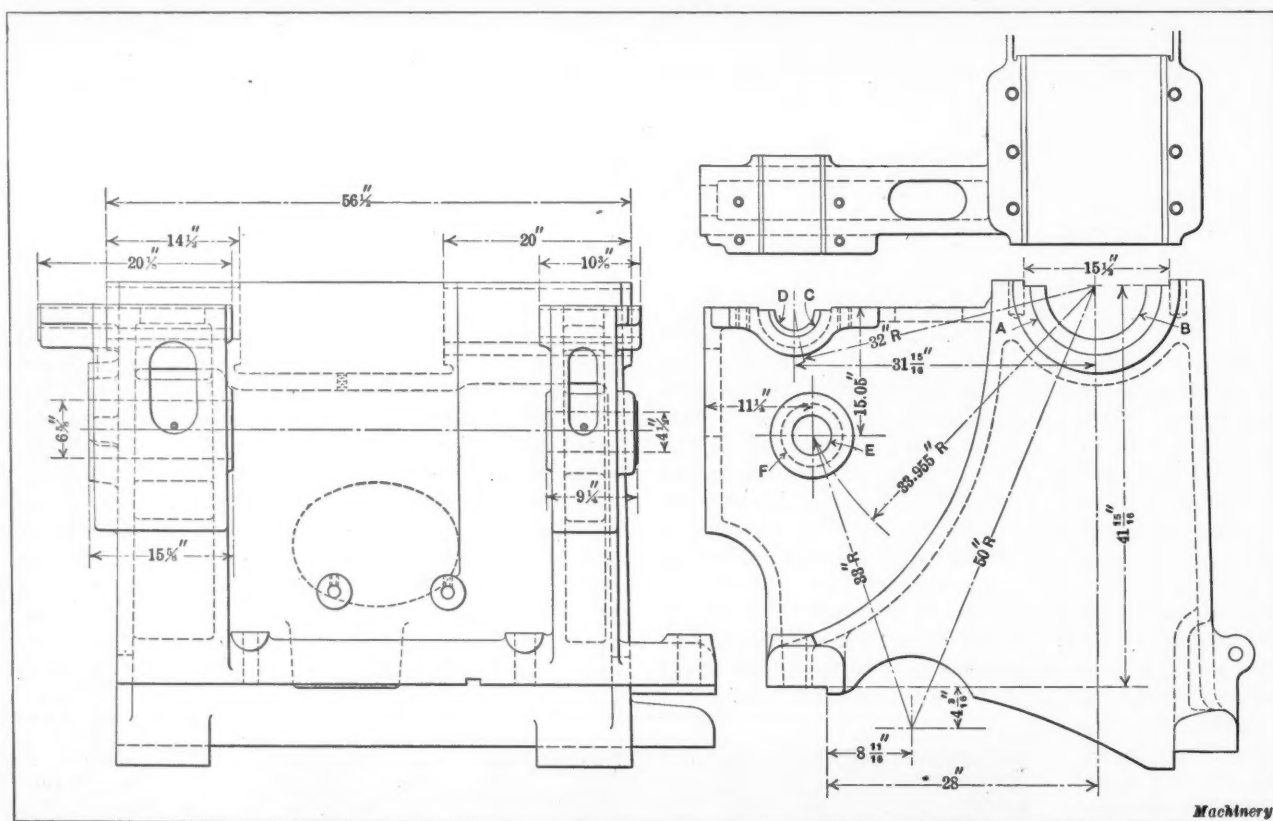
Partially Dimensioned Drawing of Headstock Casting, on which are indicated the Holes machined on the Boring Machine
